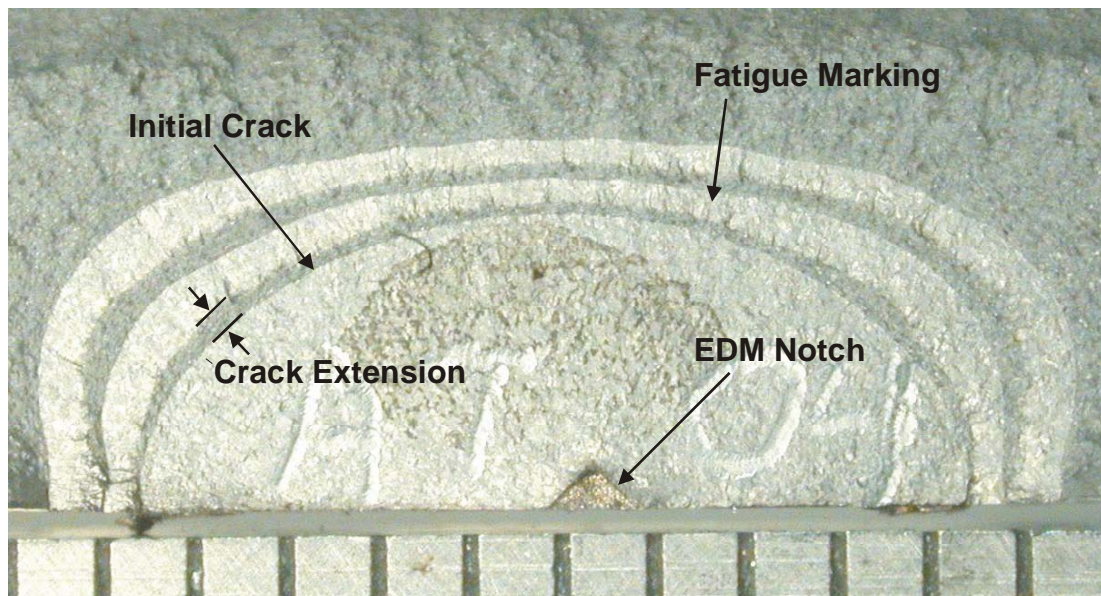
Surface Crack Fracture Surface Details
